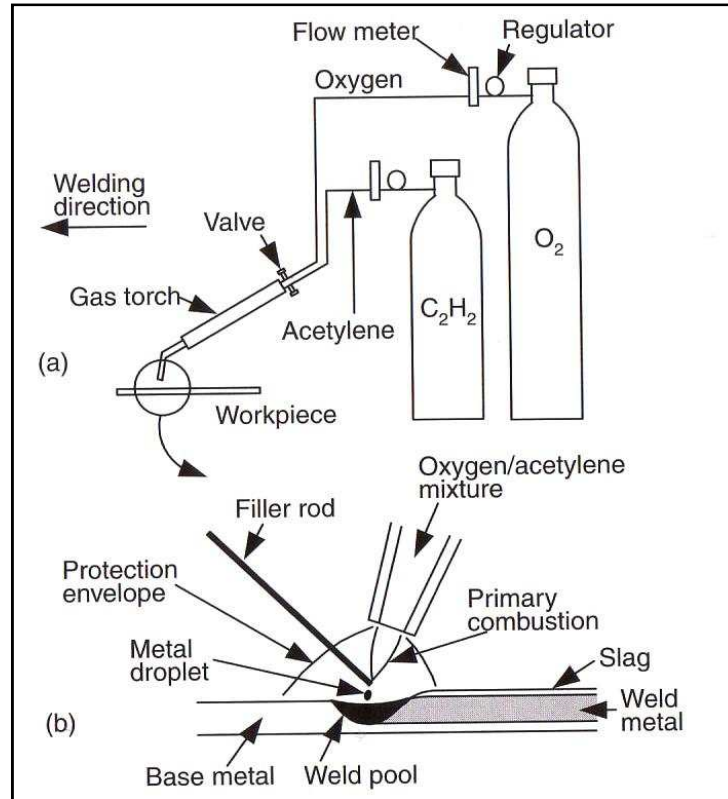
Oxyacetylene welding (a) overall process; (b) welding area [88]
